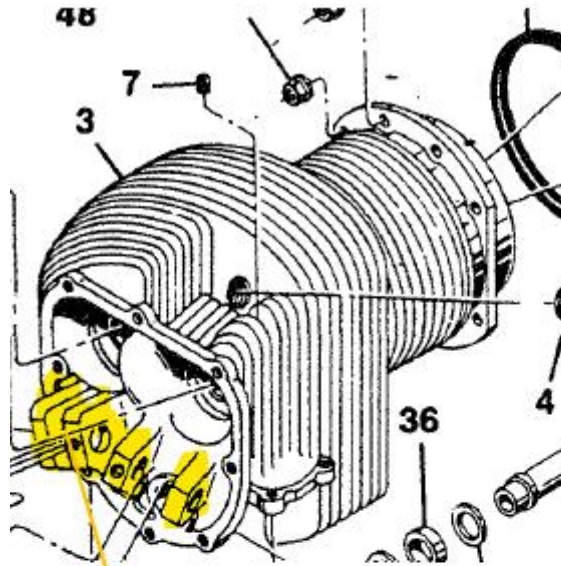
Damage caused to the number 5 cylinder rocker shaft boss.
